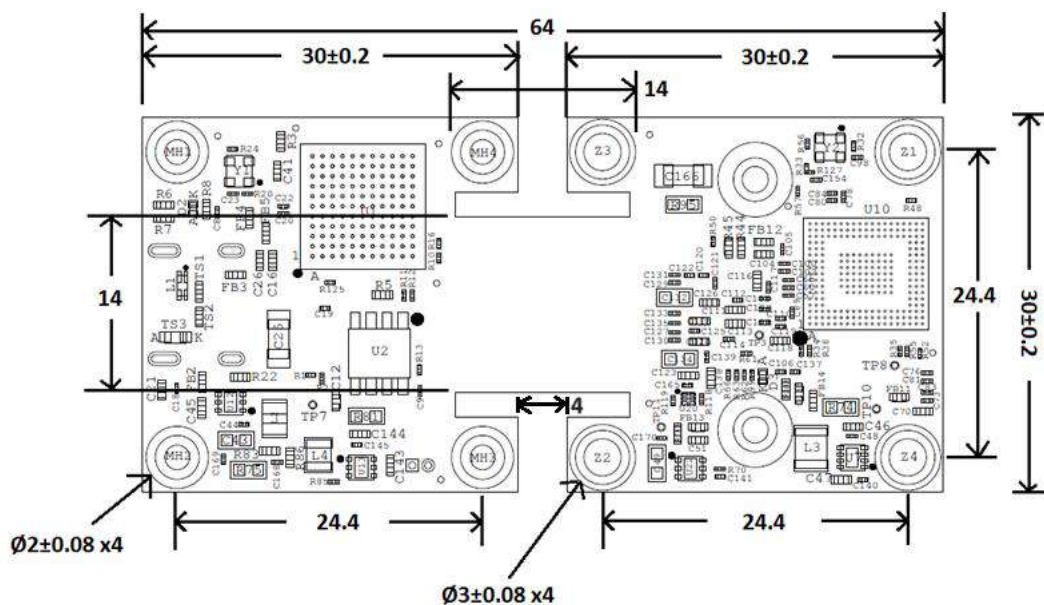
Top View of See3CAM_CU27 Mechanical Dimensions
